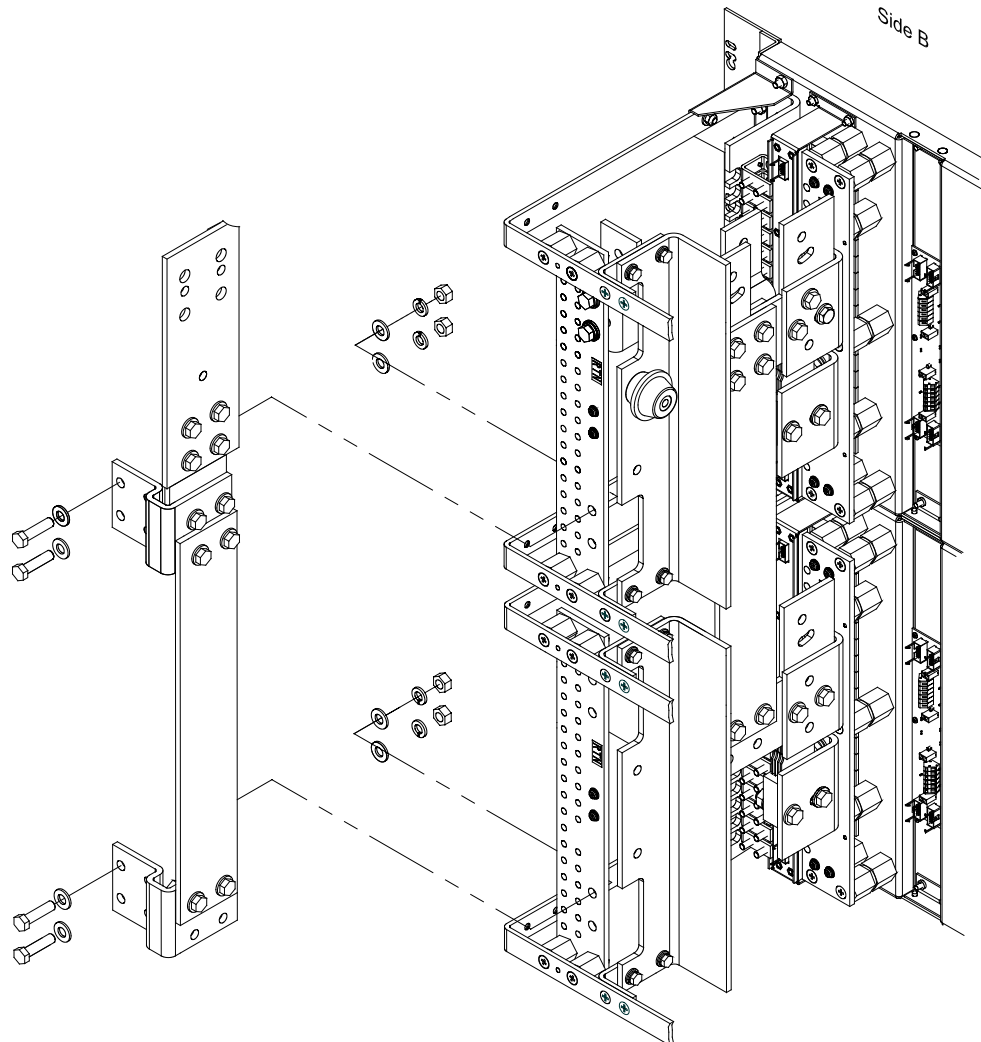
Installing RTN Expander Bus & Bar Assembly
